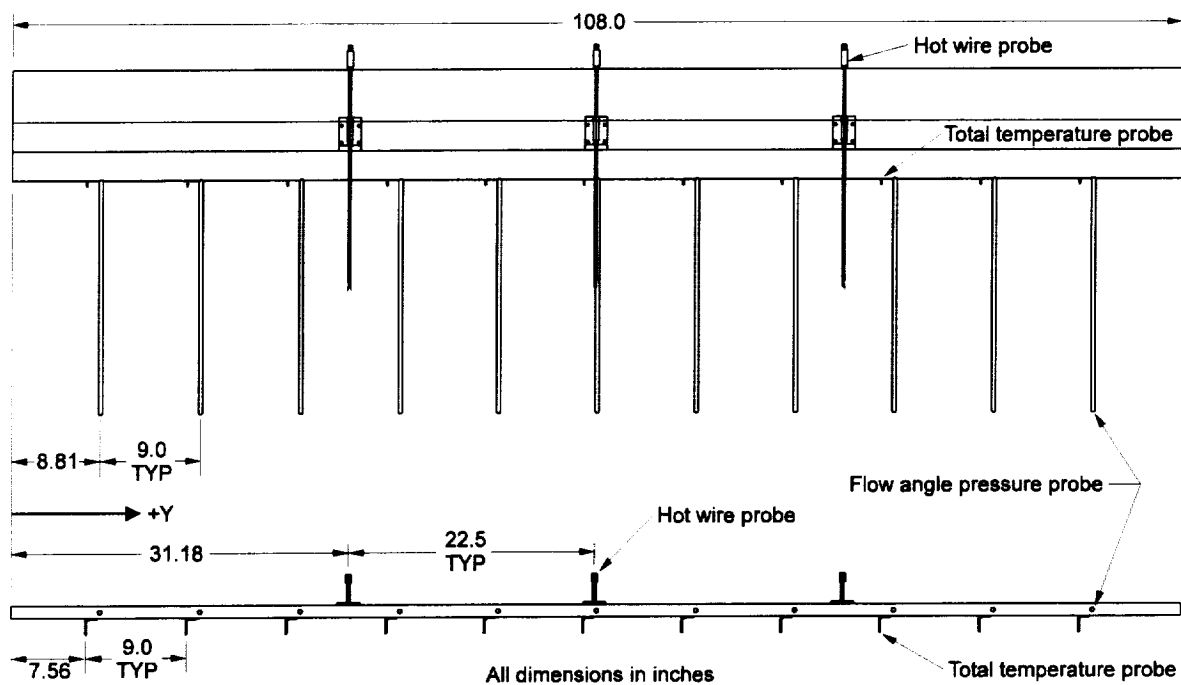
Plan and front views of the 9-foot horizontal survey rake.
